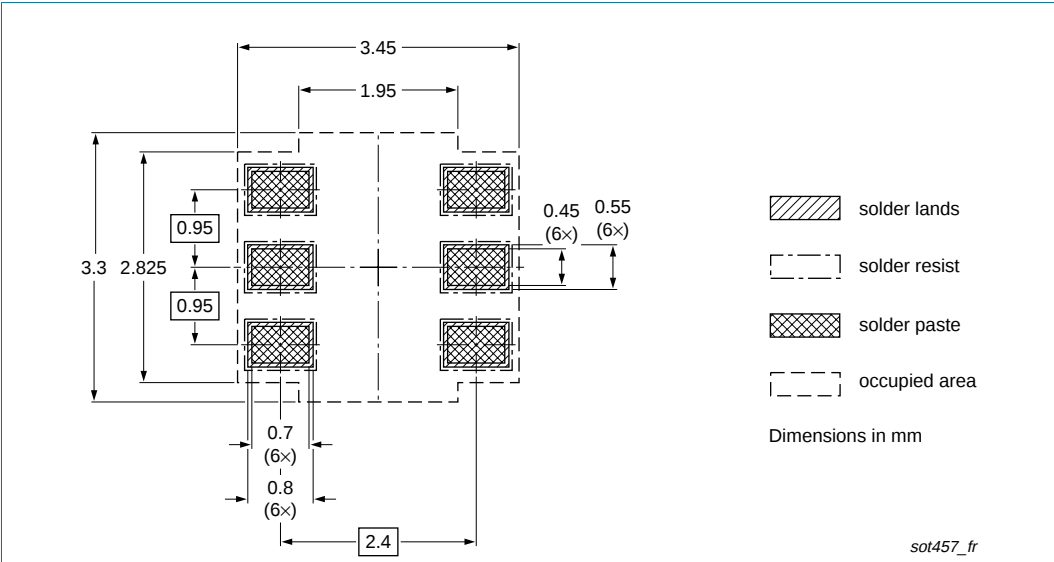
Reflow soldering footprint SOT457 (SC-74)
